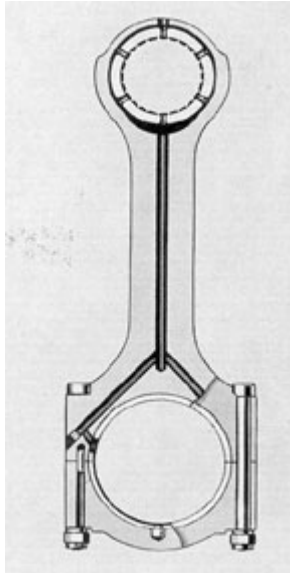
Connecting rod oil passages, GM 16-278A.
